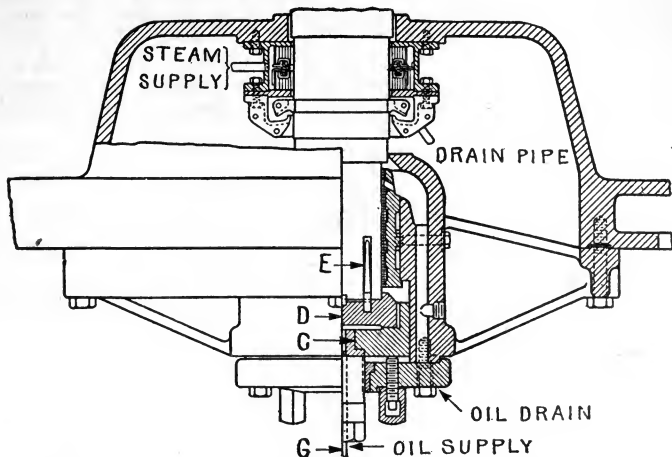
,477.—Curtis step bearing. There are two cast iron blocks, C and D, one carried by the end of the shaft, and the other being adjustable by set screws. Both blocks are recessed, forming a space into which oil is forced through a central bore, with sufficient pressure to raise the shaft and support its weight on a thin film of oil. The lubricant oozes out through the bearing to the overflow.
